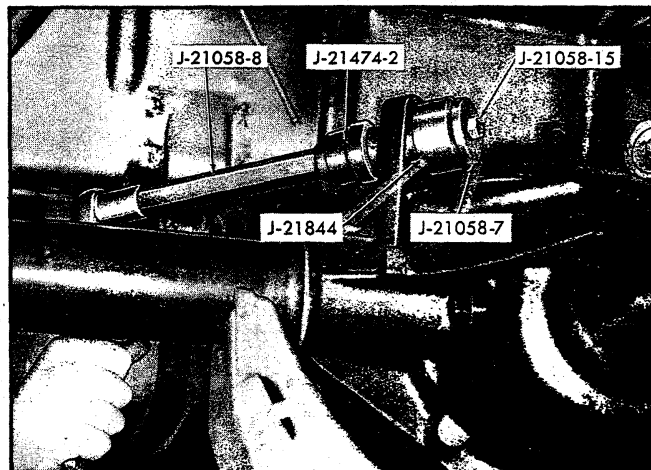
Carrier Mounted Suspension Bushing Installation (Light-Duty) (Chevelle)
